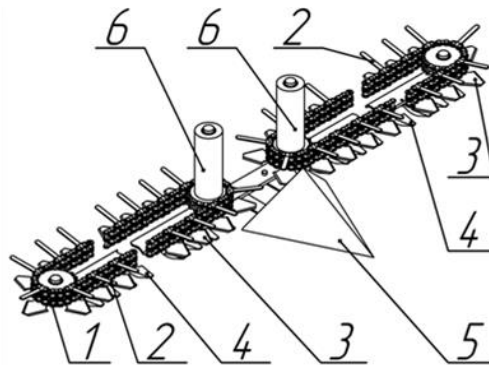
Cutterbar of the combing harvester: 1 – endless traction element; 2 – transporting rake; 3 – segment knives; 4 – counter cutting fingers; 5 – divider; 6 – deflecting rollers
